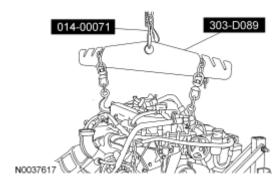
Identifying Special Tools (014-00071, 303-D089) Courtesy of FORD MOTOR CO.
